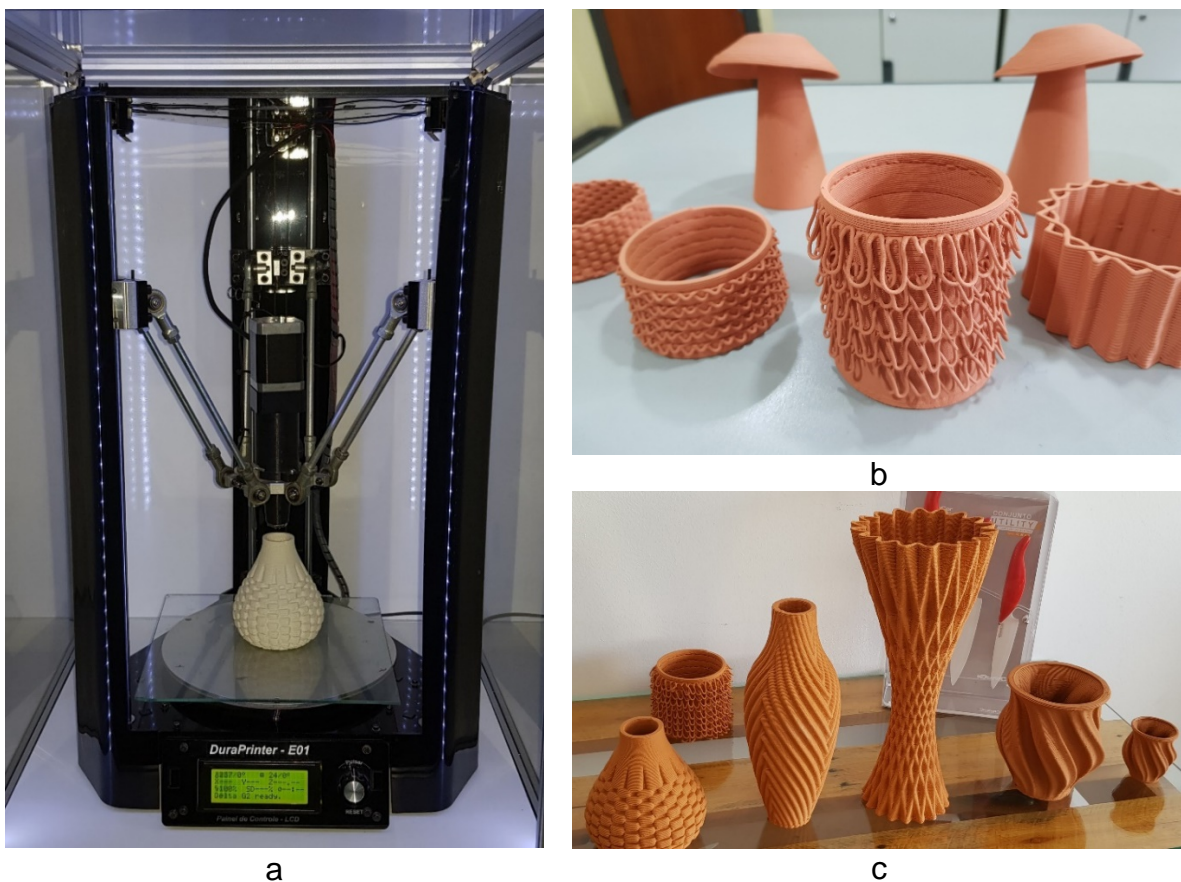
(a) Screw extrusion 3D printer; (b) and (c) 3DP fired terracotta
